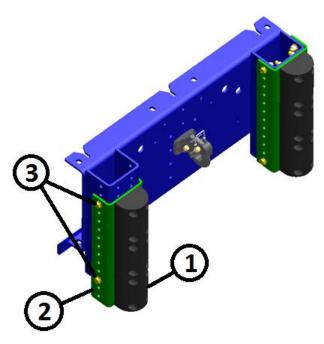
Bumper Adjustment Key 1 – Rubber Stop Key 2 – Side Rail
